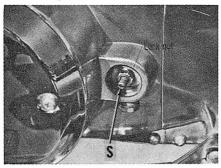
View of clutch adjustment screw for S32-2, Model T10 is similarly located on left side.
